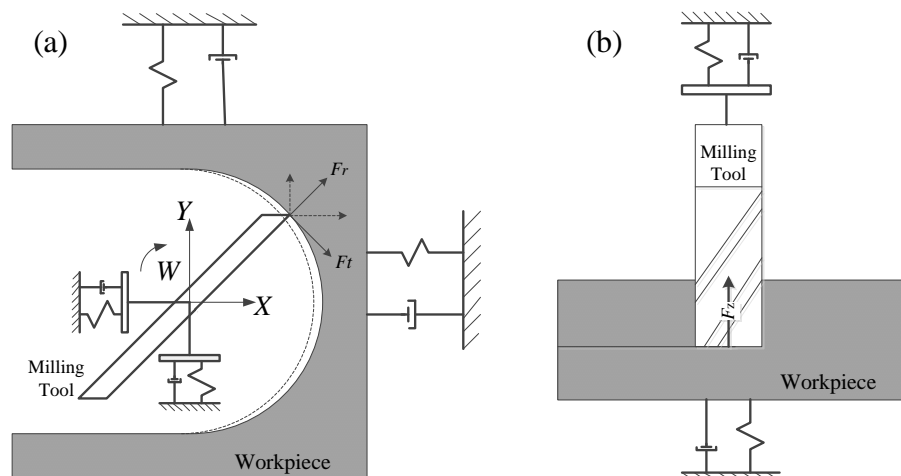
Schematic diagram of tooling and workpiece spring-damper system
